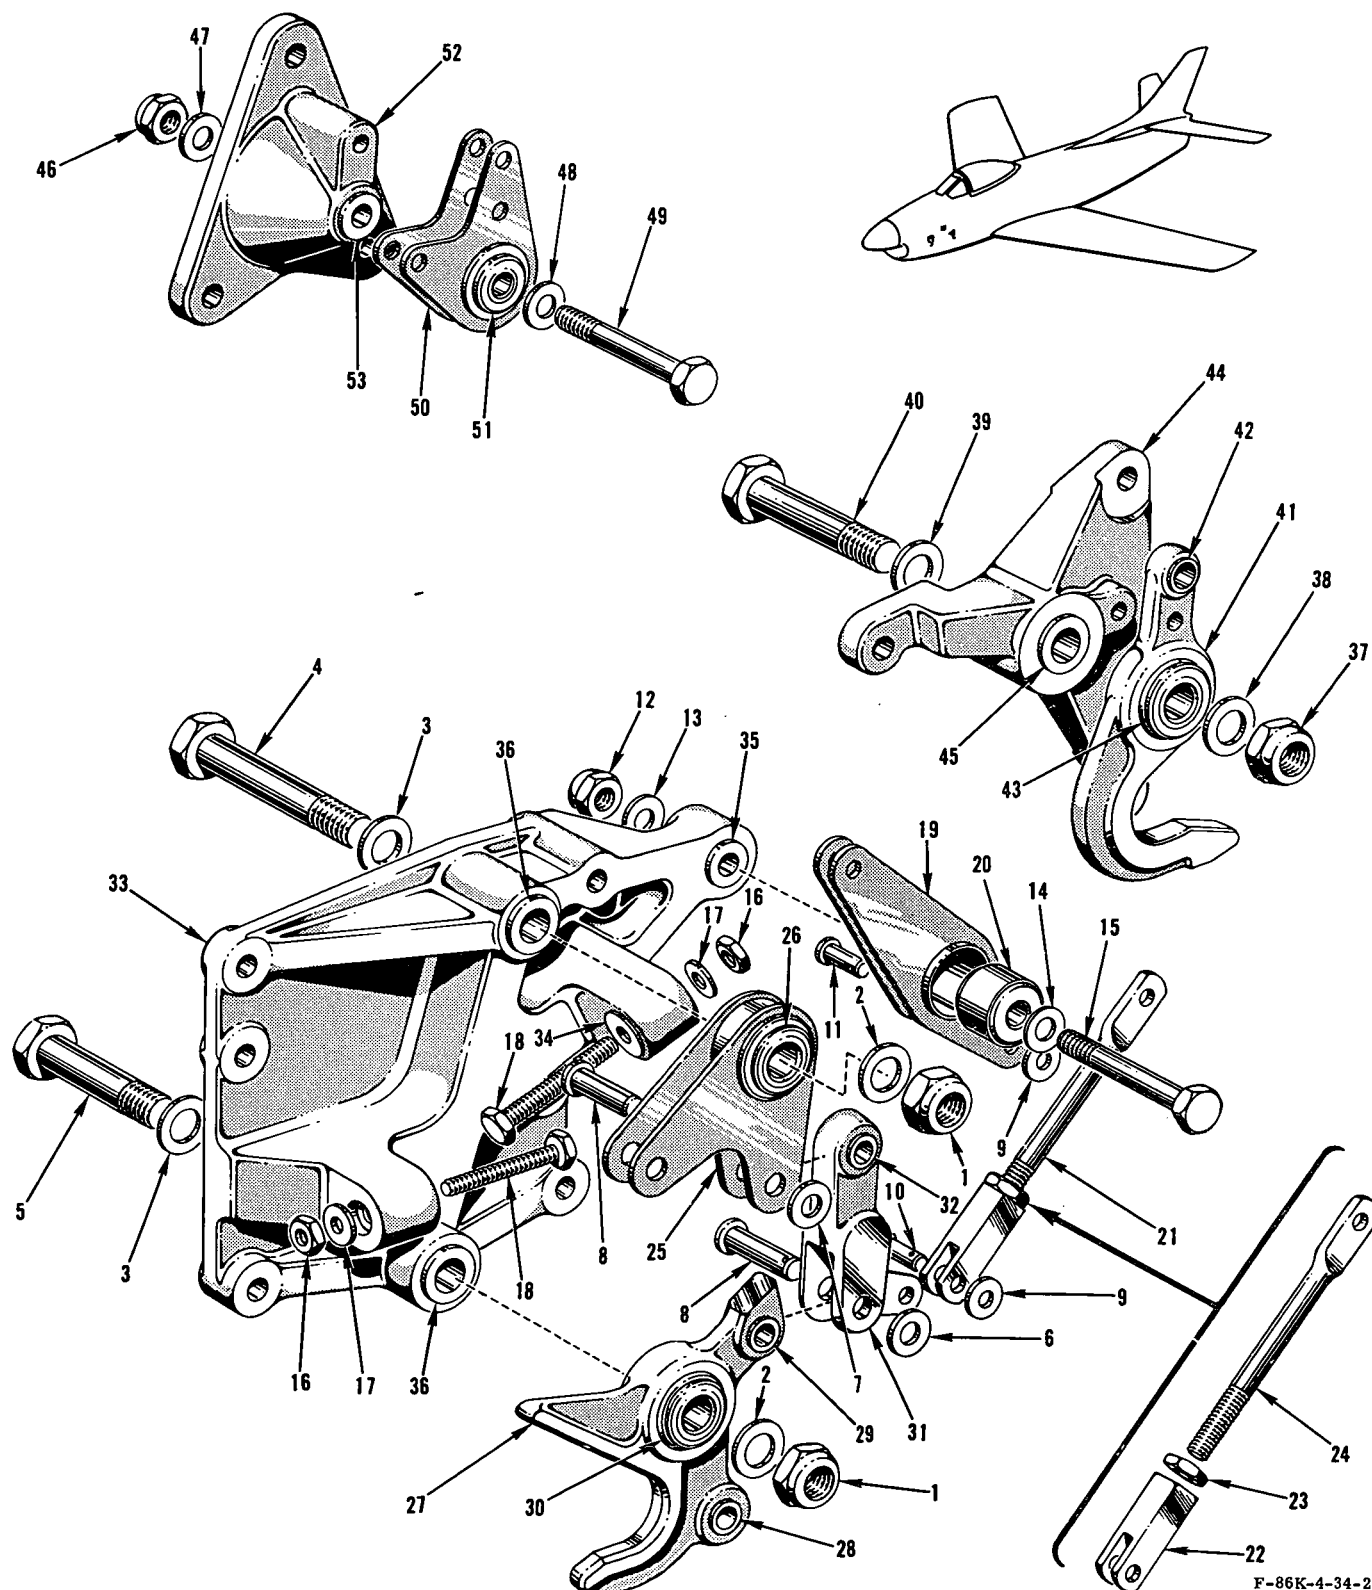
AUXILIARY ALIGHTING GEAR WHEEL DOOR LATCHES
